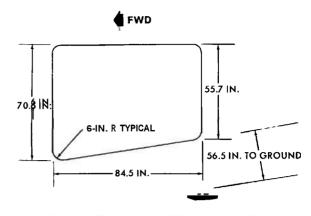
CARGO DOOR DIMENSIONS, C-47 AIRCRAFT
